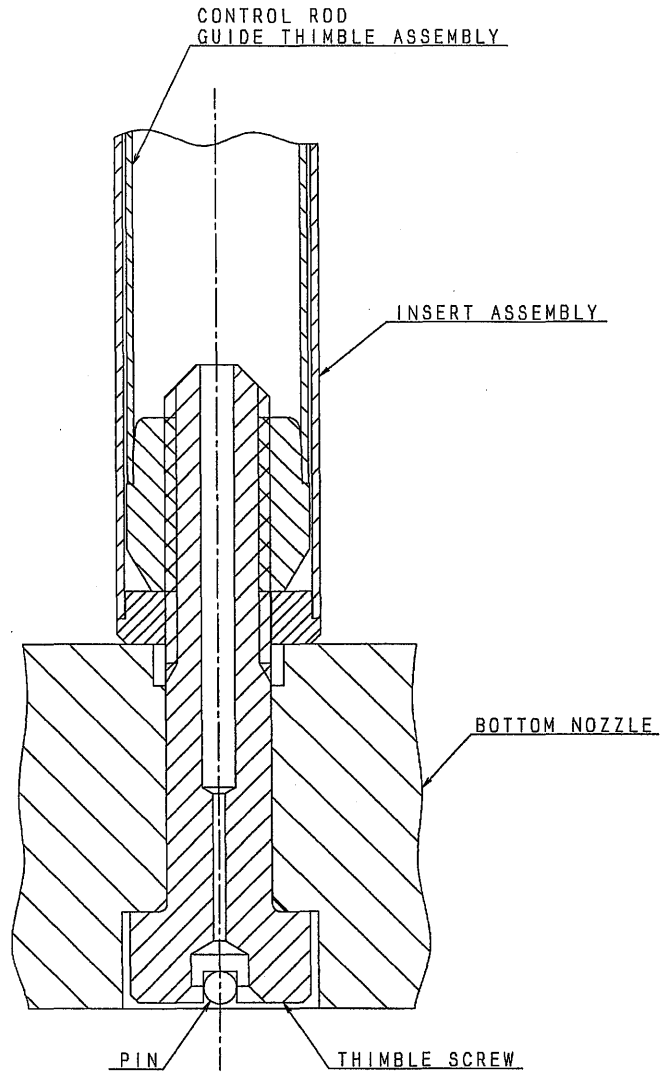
Control Rod Guide Thimble to Bottom Nozzle Joint
